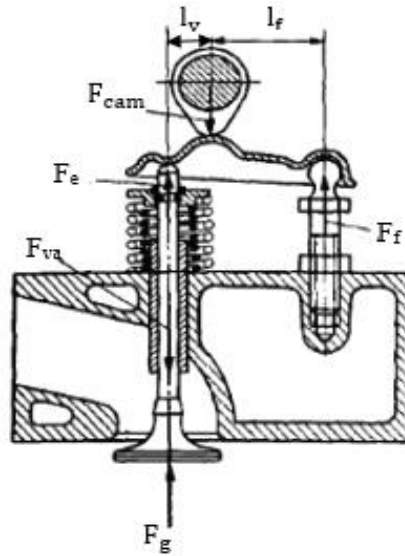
45 Valve gear Mechanisms of OHC Engines [37]
